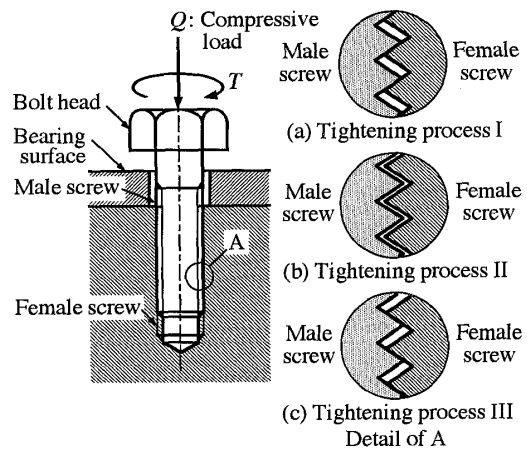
Relationship between male and female screws in tightening process: (a) before contact of bolt head with bearing surface; (b) just after contact; (c) after tightening
